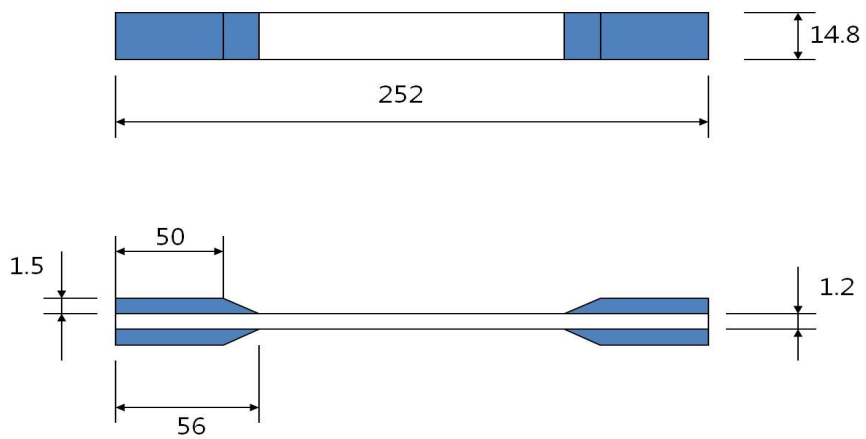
Dimension and Shape of Tension Specimen 0°
